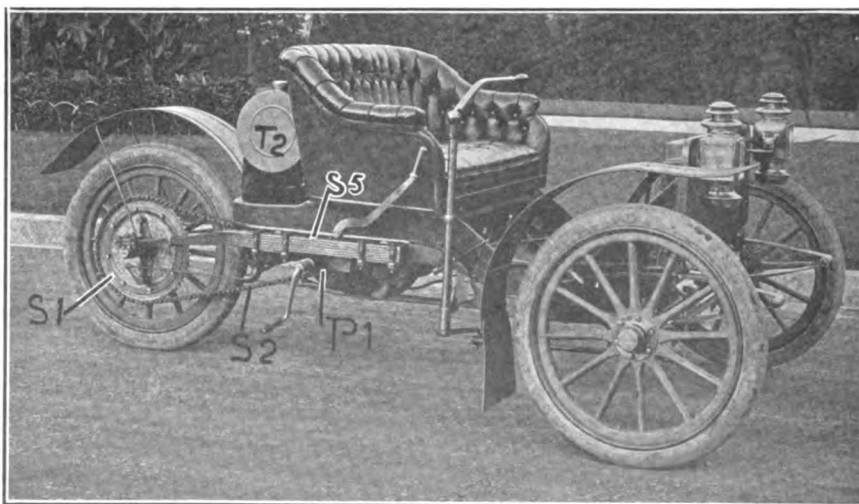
Side elevation of the Kelsey Motorette, showing the single rear wheel drive and other important details
